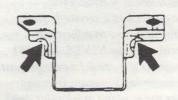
Thicker corner flanges on Engine Mount Bracket, P/N 75 49 579.
